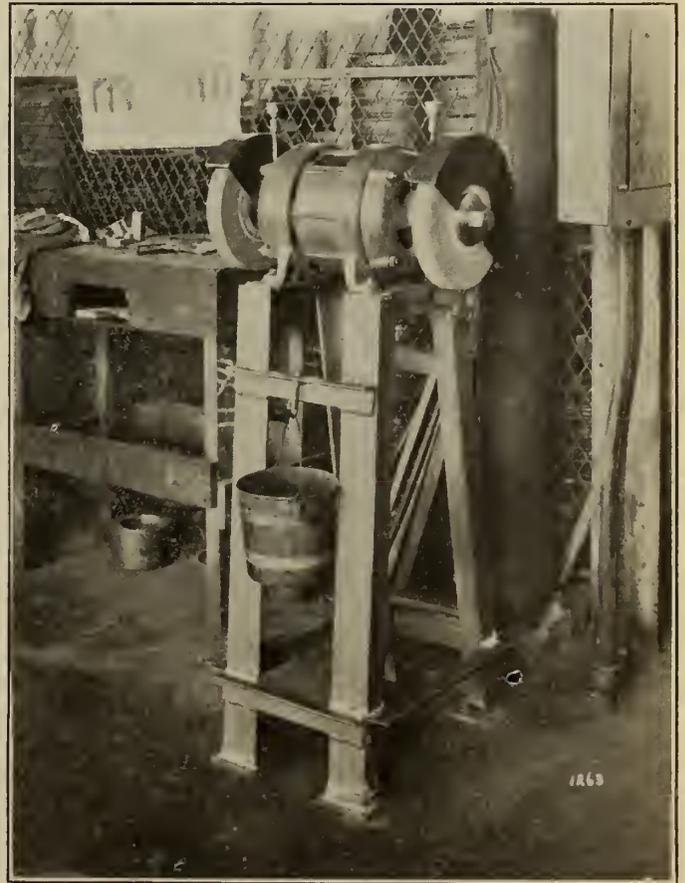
Steel Stand for Motor-Driven Grinder. Lighter, Stronger and Cheaper Than Cast Iron.
